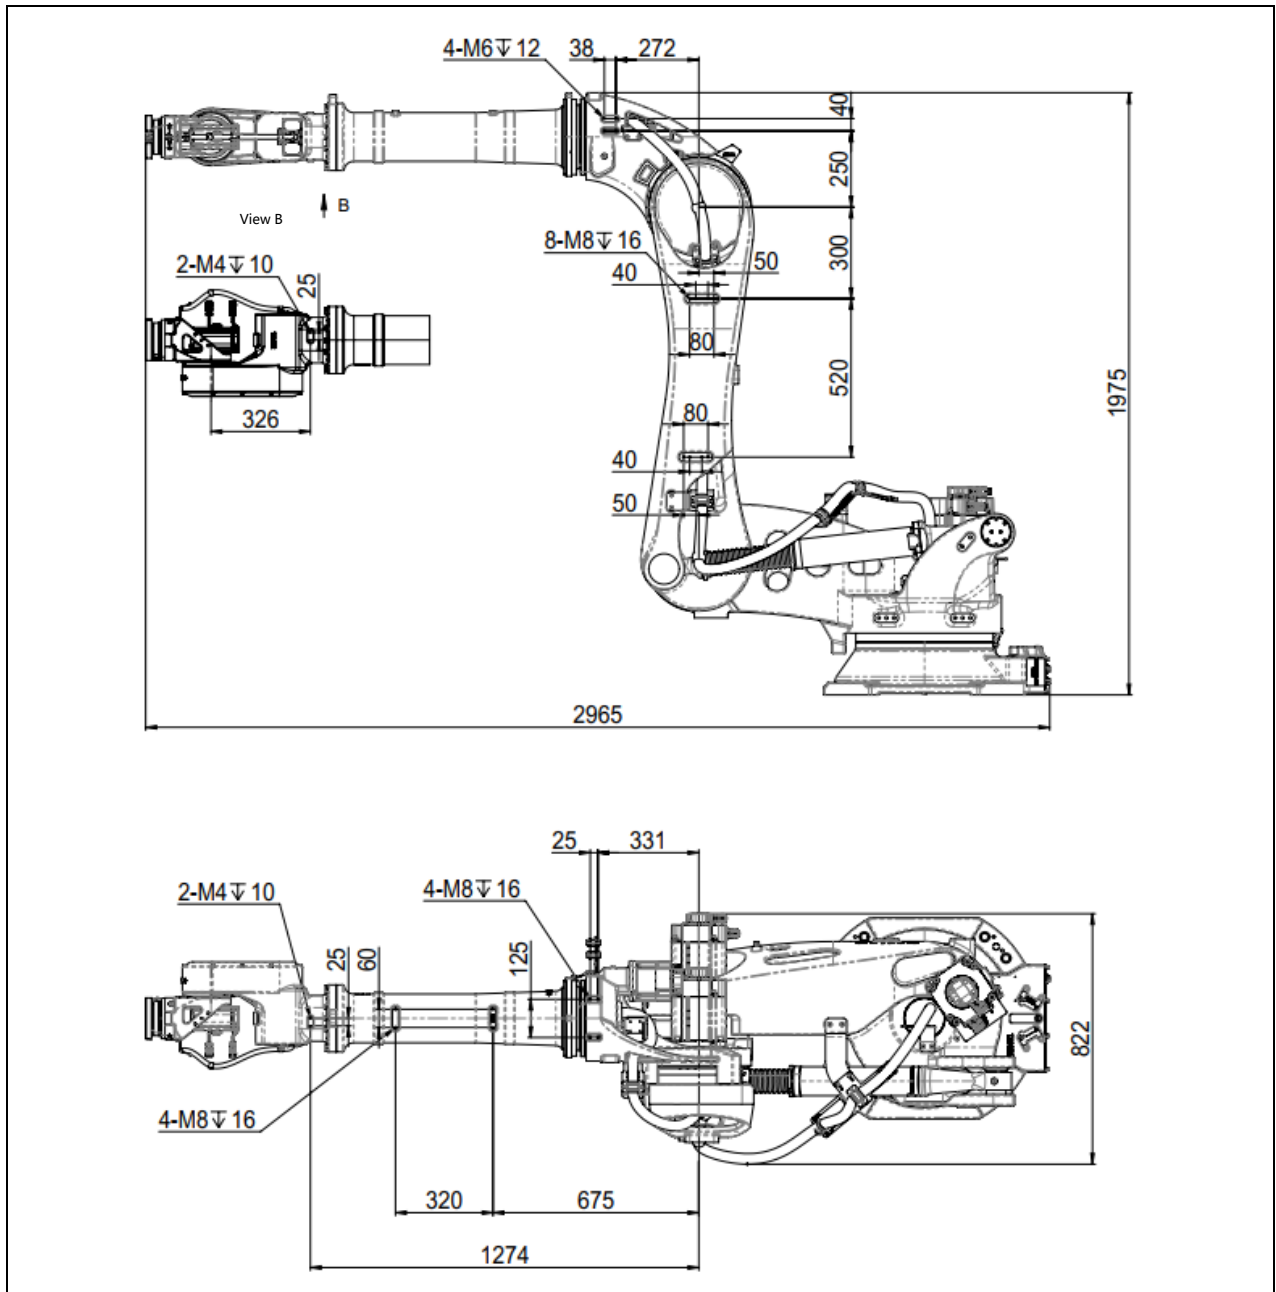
Equipment mounting face (ER100B-3500-DW)
